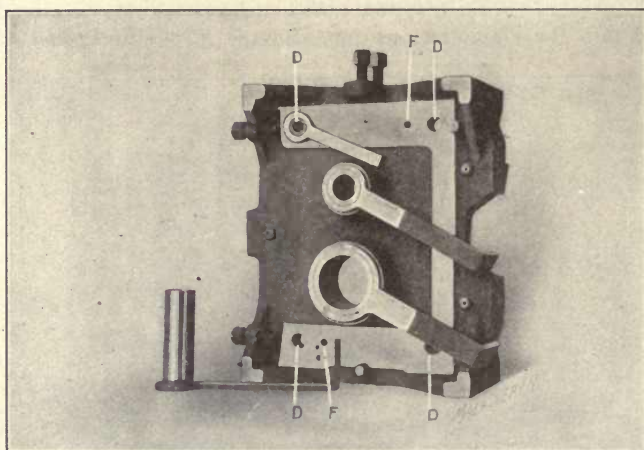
Rear View of Drill Jig shown in Fig. 73
